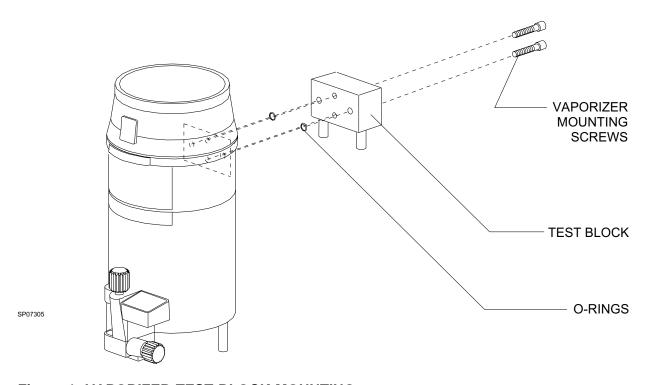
VAPORIZER TEST BLOCK MOUNTING
